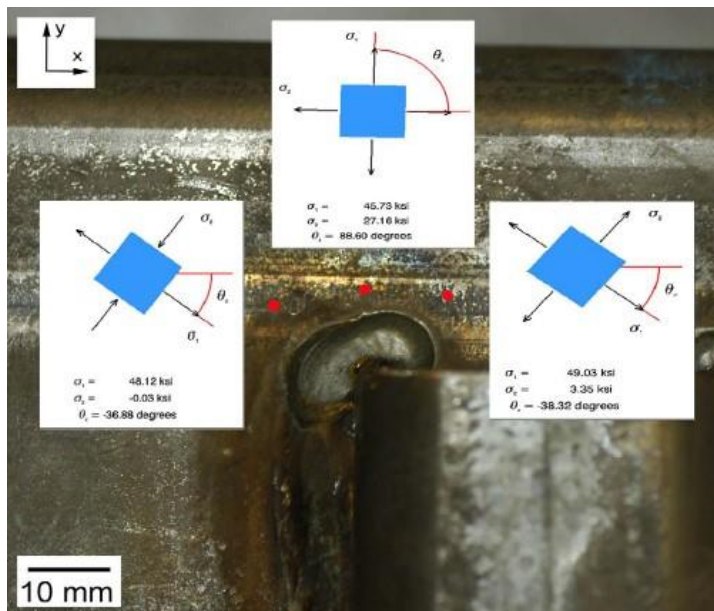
15: The residual stress measurements near the weld toe surface for a Complex tubular welded joint under torsional and bending loads [65]
